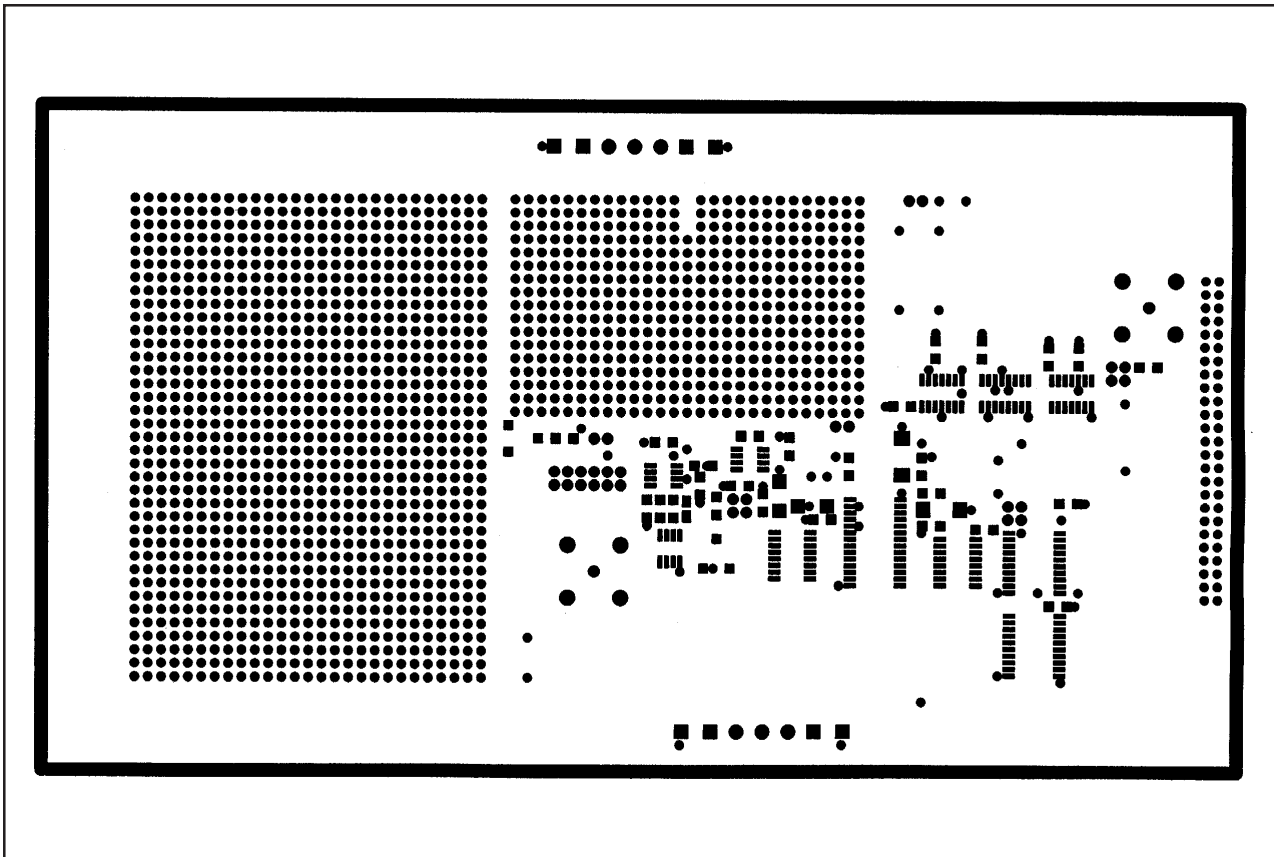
Top Soldermask of the DEM-ADS7815U Demonstration Fixture.
